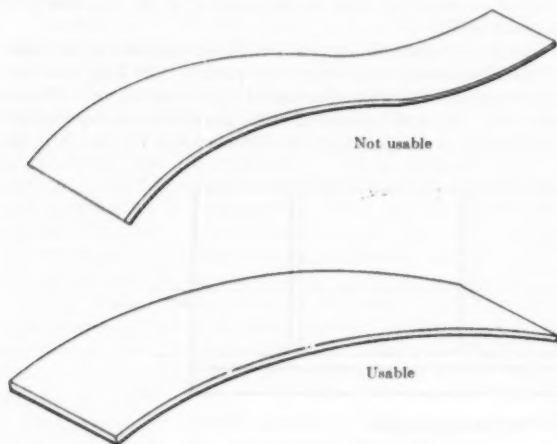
PLATE STOCK FOR INTEGRALLY MACHINED SKINS
